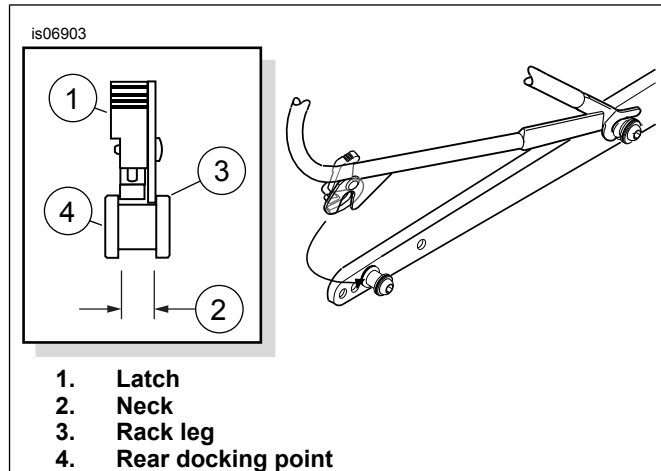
Pull back rotary latches and lower rack onto rear docking points.
